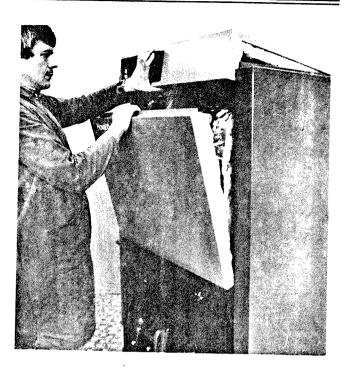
Lift cover, install front panel and clamp by lowering cover.
